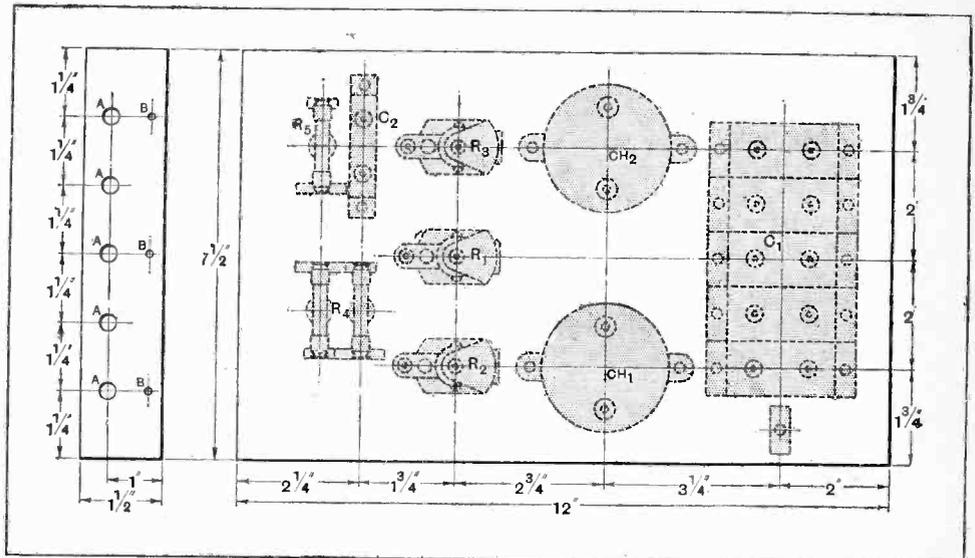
Layout of the parts of the D.C. eliminator and the terminal strip. The holes have the following diameters: A 5/16in. B 1/8in.
